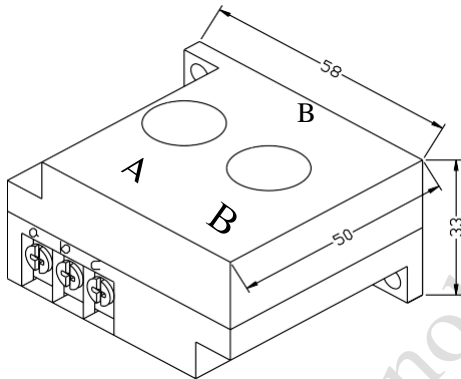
CT2 mechanical drawing (φ10 drilled hole)
